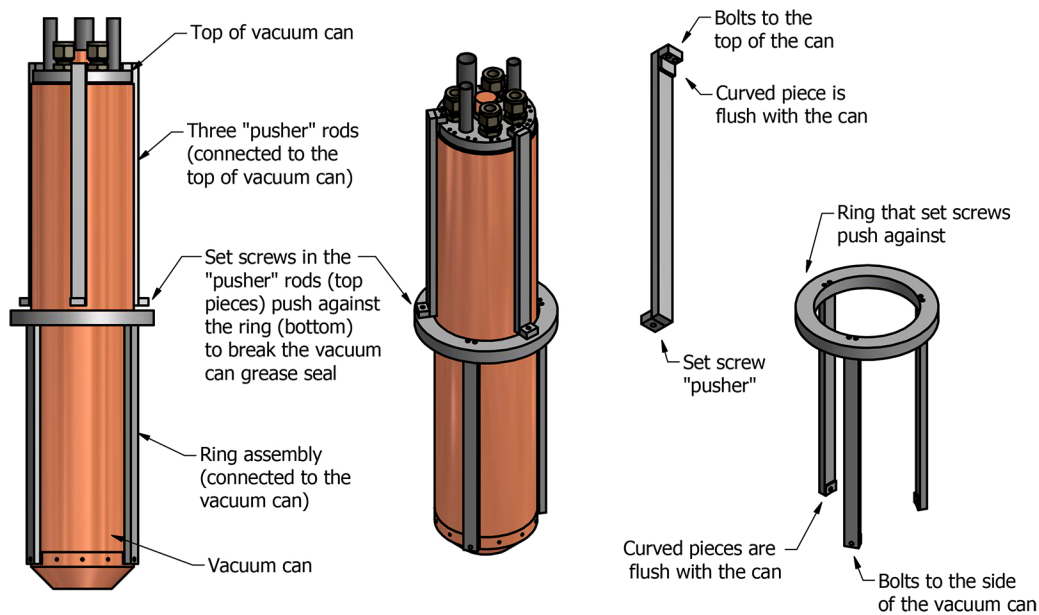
Schematics of the assembly used to dismantle the vacuum can. Left: Side-on view of the vacuum can with the assembly attached. The assembly consists of three “pusher” rods connected to the top of the can and a ring assembly with three rods connected to the base of the can. Set screws insert into the pusher rods to push against the ring and release the vacuum seal. Note that the can releases suddenly, so it is critical to support the can from the bottom during disassembly. Center: Angled view of the removal assembly. Right: Angled views of the pusher rod (top) and ring assembly (bottom).
